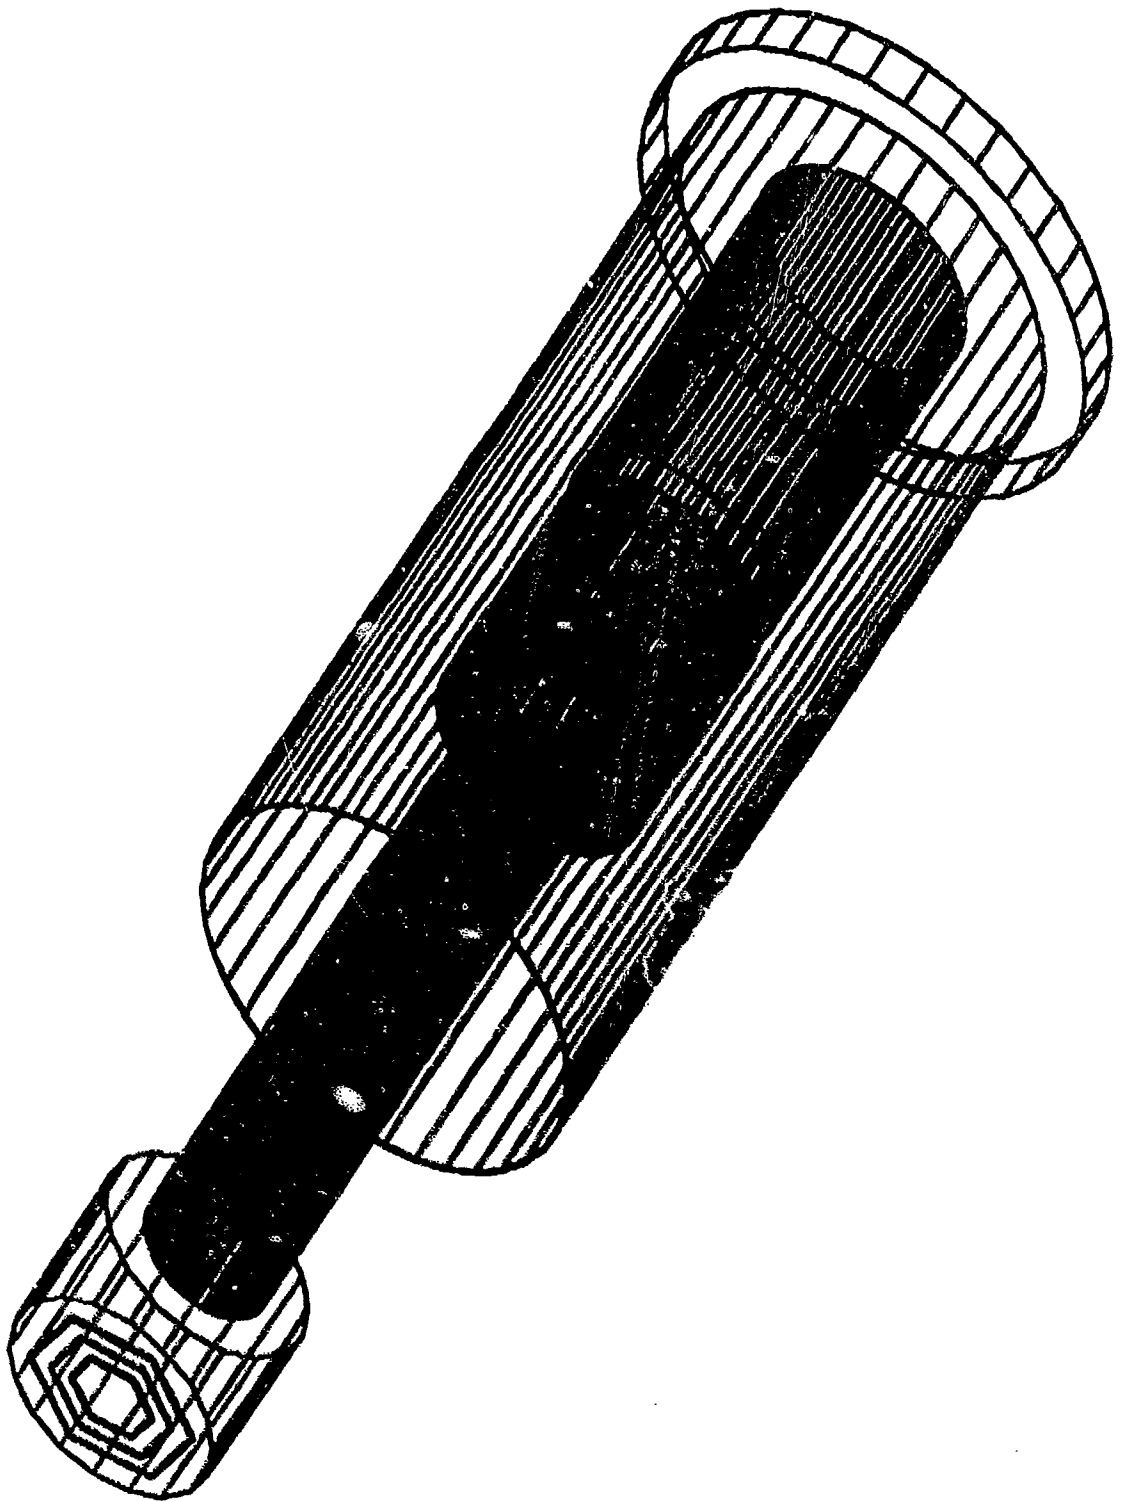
THE ADJUSTABLE NUT DRIVER
